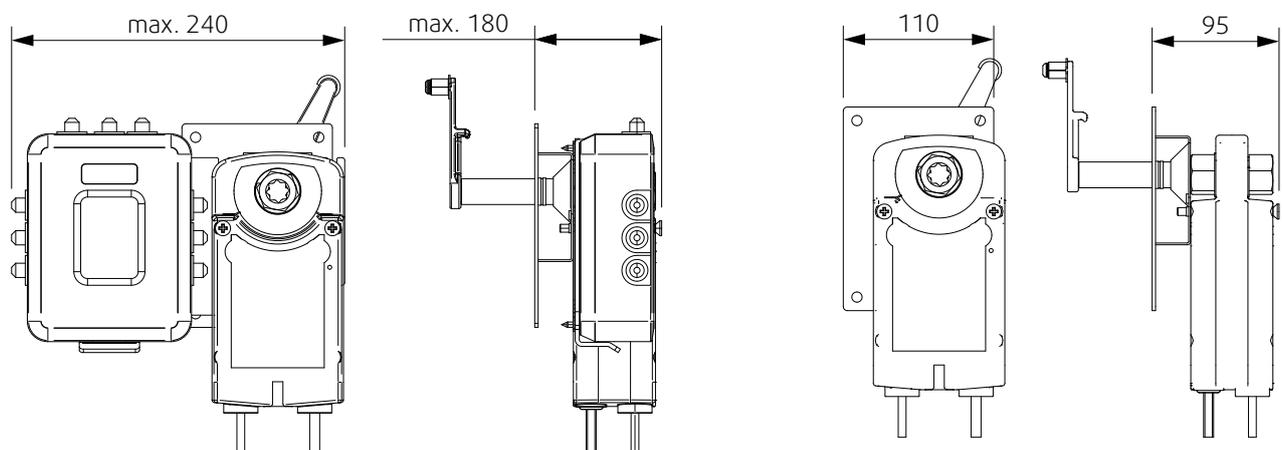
Dimensions of the Gruner actuator mechanism with (left) and without (right) communication unit
